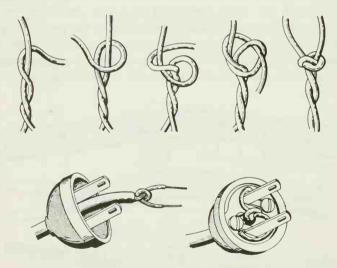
A knot should be securely tied in the end of the wire before it is attached to the plug binding screws; this procedure will prevent the wire from being pulled aff the screws when the plug is withdrawn from the receptacle.
